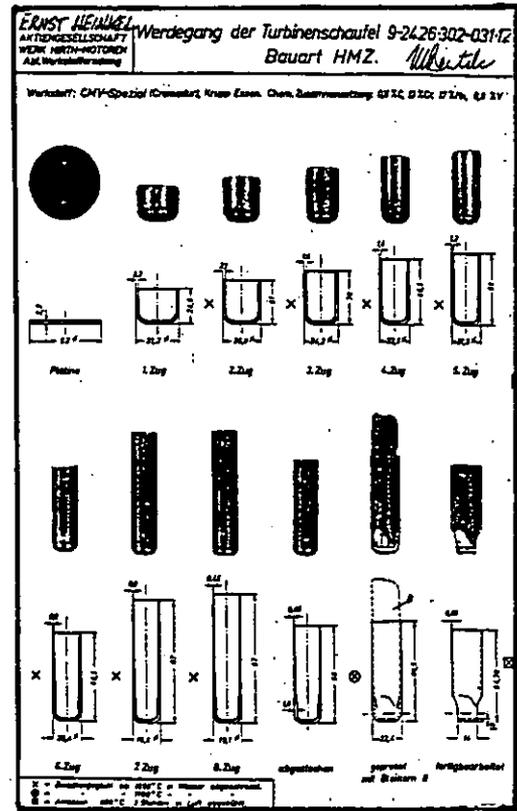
Ingenious method of developing air cooled turbine blade starting with a circular plate 25 mm dia.
